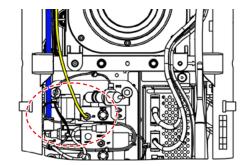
Pneumatic Tubing Connecting Pneumatic Manifold and Fluidics PCB Assembly
